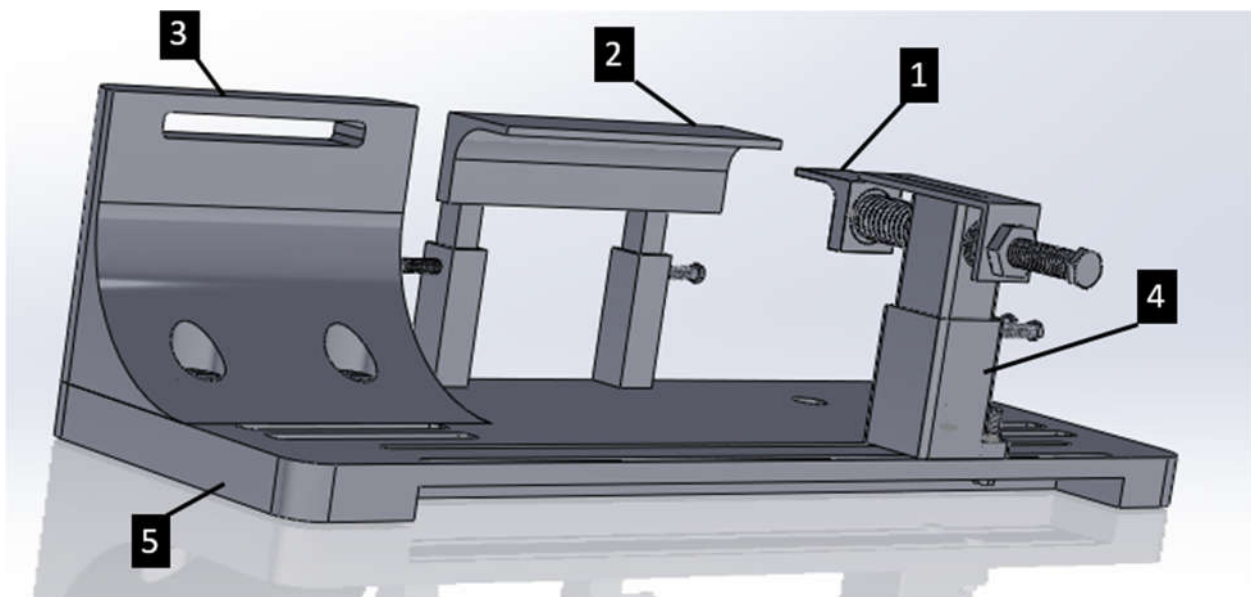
Previously completed design utilizing bending with the major parts labeled: 1. Force Application Piece, 2. Arm Alignment Piece, 3. Forearm Support Piece, 4. Spring Attachment Piece, 5. Device base
